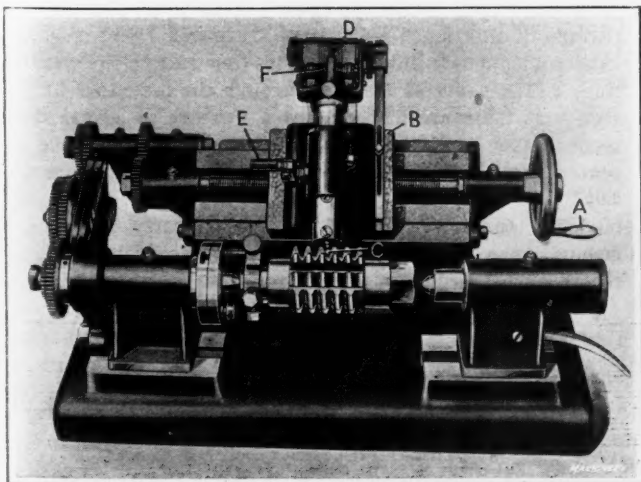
Front View of Gaging Machine for measuring and recording Magnitude of Error in Lead of Hob Thread after grinding
